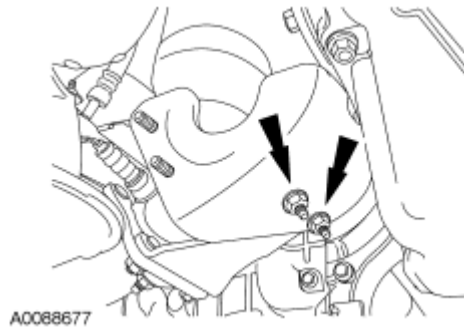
Locating Exhaust-To-Intermediate Shaft Bracket Nuts
